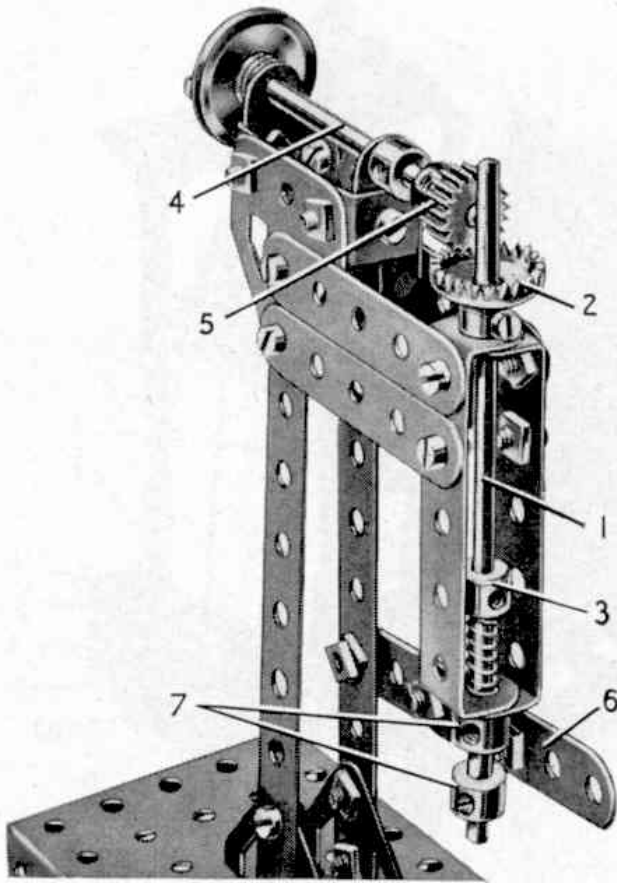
An application of the Rod with Keyway to form the drill spindle of a model drilling machine. By its use the spindle is free to rise and fall without interruption to the drive.
